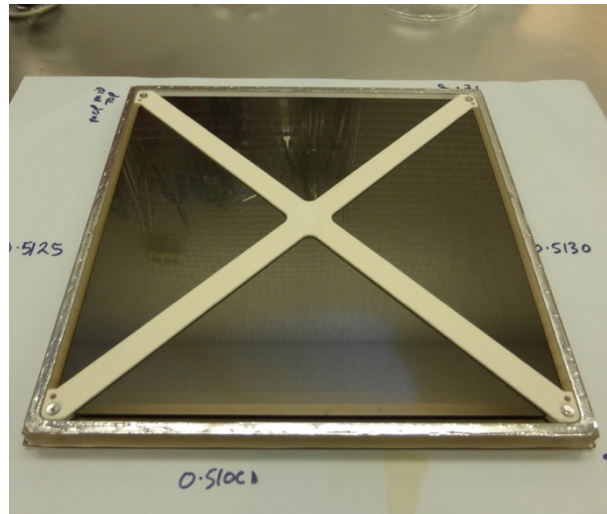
The 20 cm × 20 cm lower tile assembly shown with the microchannel plates installed. Corner pins secure the stack. The indium well is filled and prepared for the hot seal.
